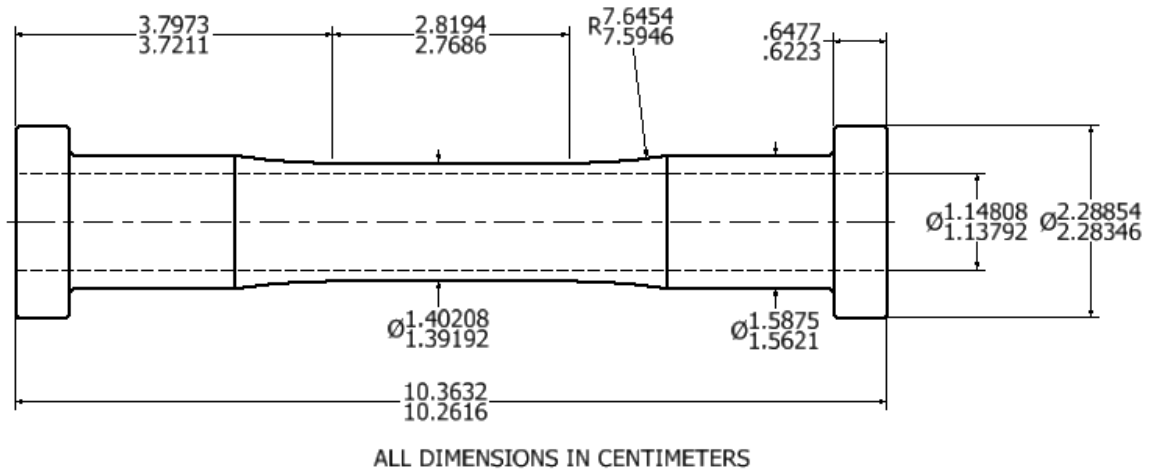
Drawing of the Original Specimen with Critical Dimensions
